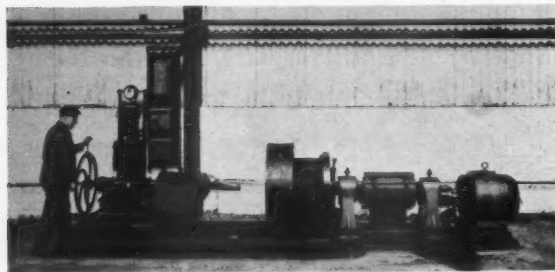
INTERMEDIATE TYPE CENTRIFUGAL CASTING MACHINE FOR CASTINGS UP TO 30 INCHES IN DIAMETER.
